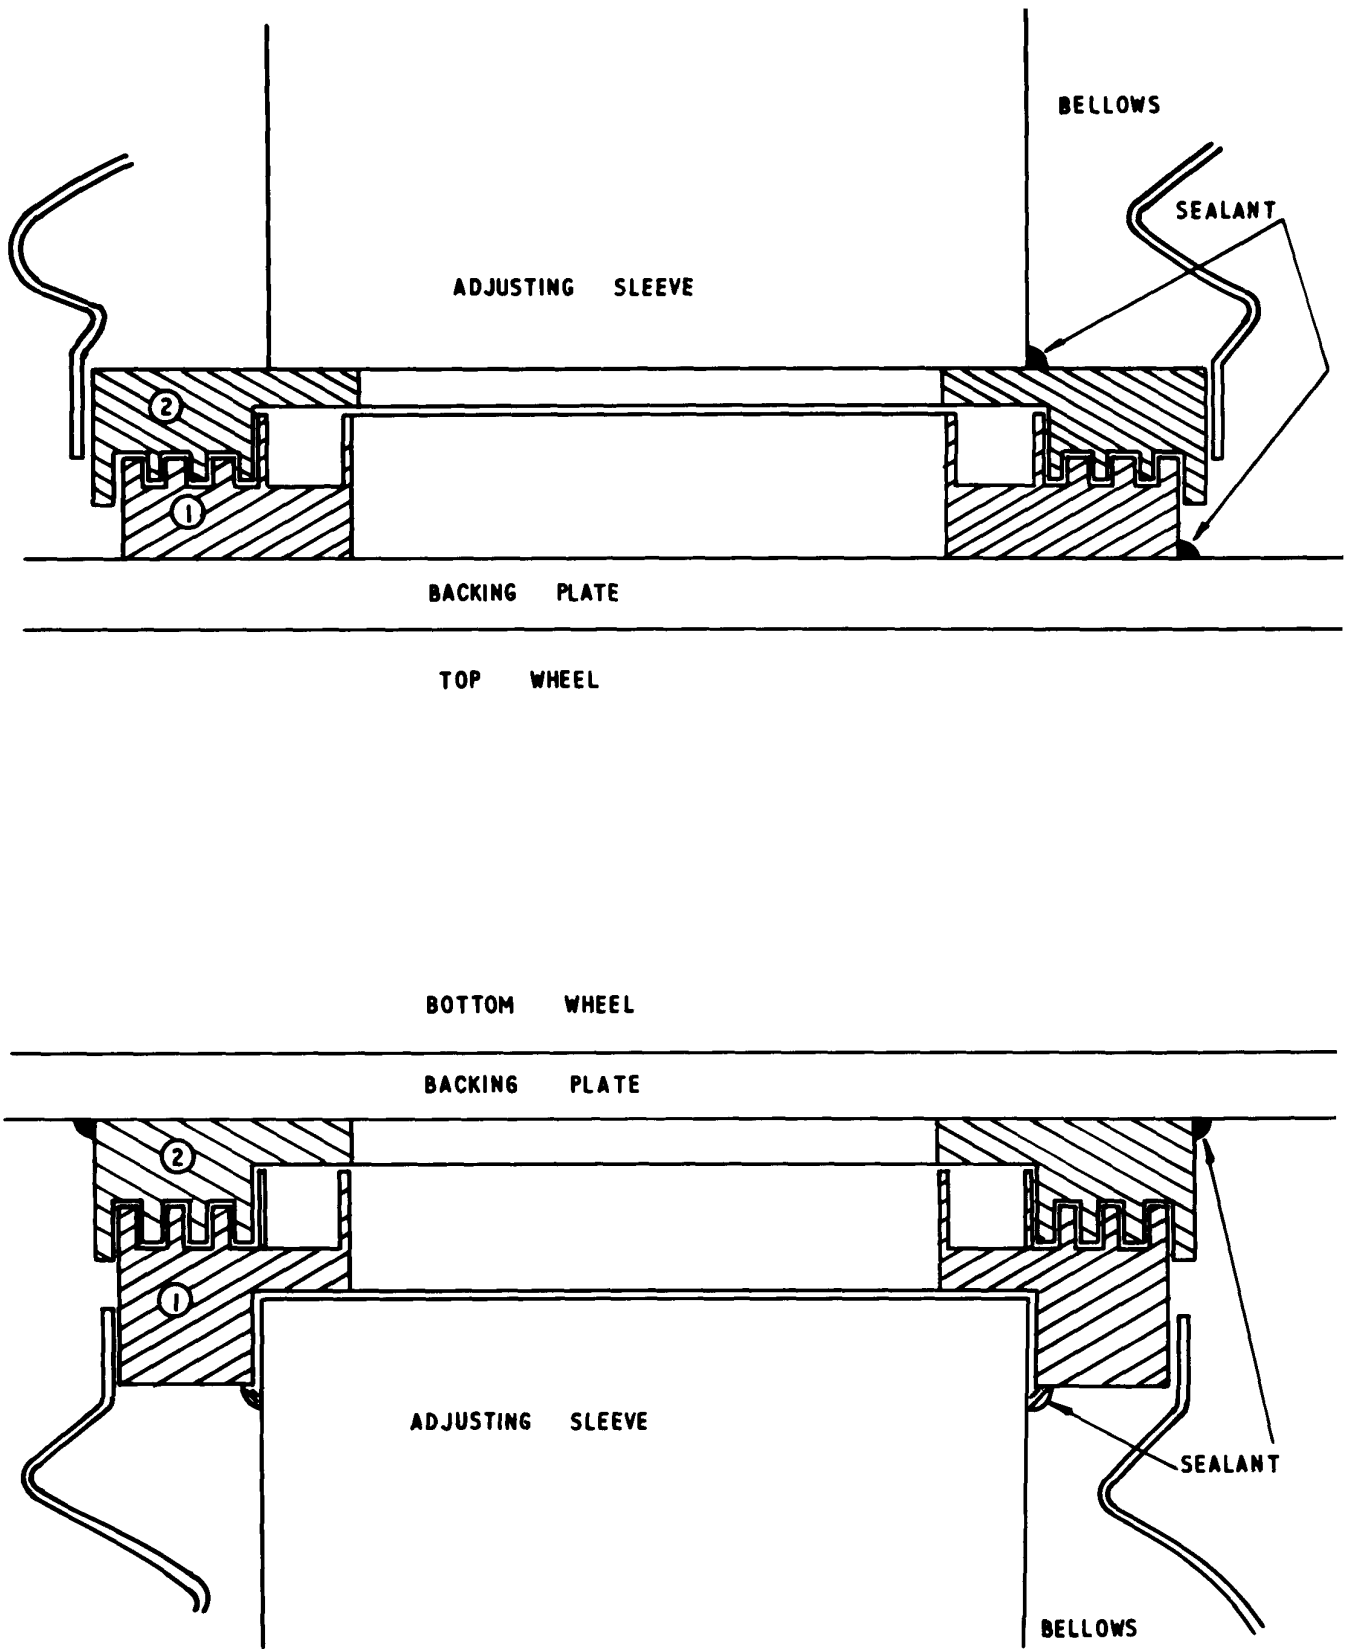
CROSS SECTIONAL VIEW OF SEALS
